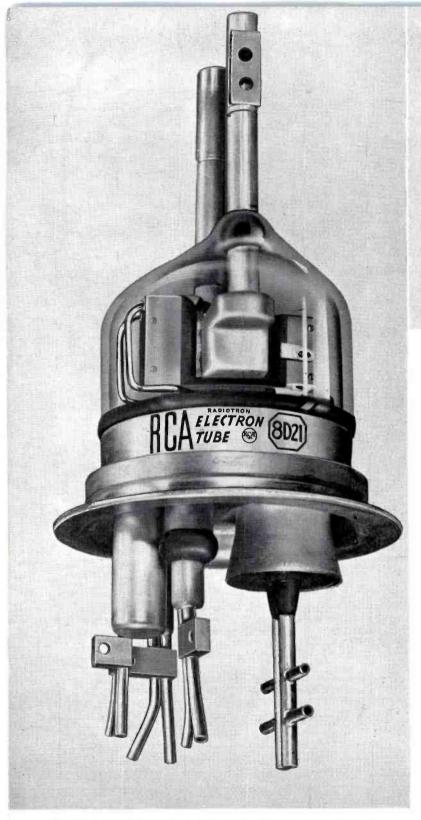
Finished 8D21 showing how the anode-dome assembly (with anode terminals of tetrodes No. 1 and No. 2 projecting from top) is welded to metal header which supports the internal structure of tube. Directly below metal header and to the right are the controlgrid terminals of tetrodes No. 1 and No. 2. To left of center, the terminal for the No. 2 grids; and to the extreme left, the filament terminals. The tube is fitted with a special cathode and beamconfining electrodes, and, because of the cathode structure used. must be operated in a horizontal position with plane of the control grids below horizontal plane of the filament leads.
